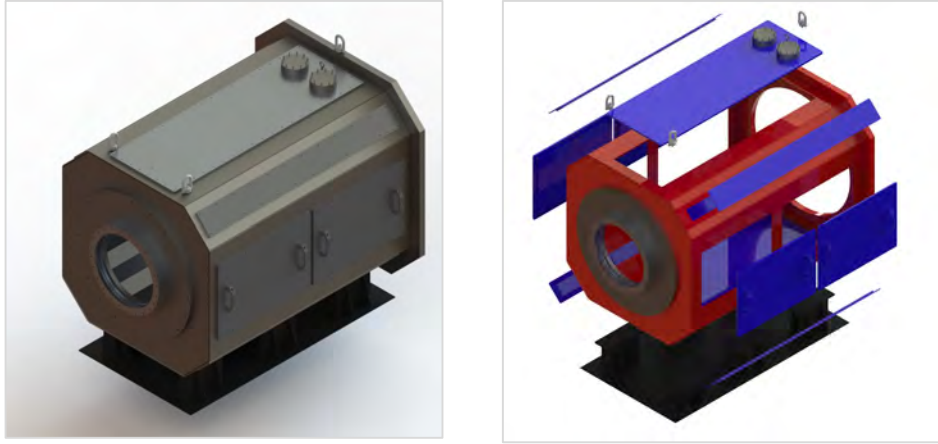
CAD renderings of the test section with skeleton (red), access panels (blue), and base stand (black).
